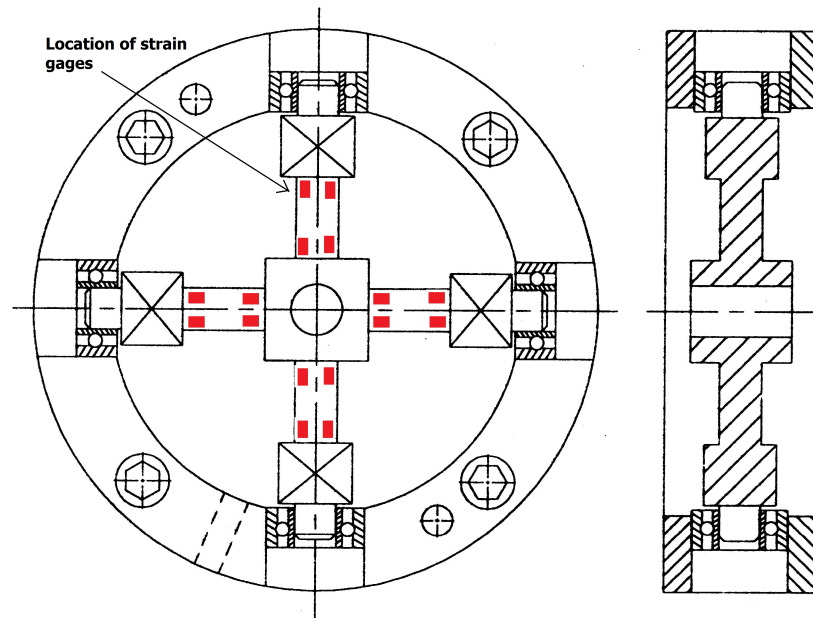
The assembly drawing of the novel six-axis wrist force sensor [7].
